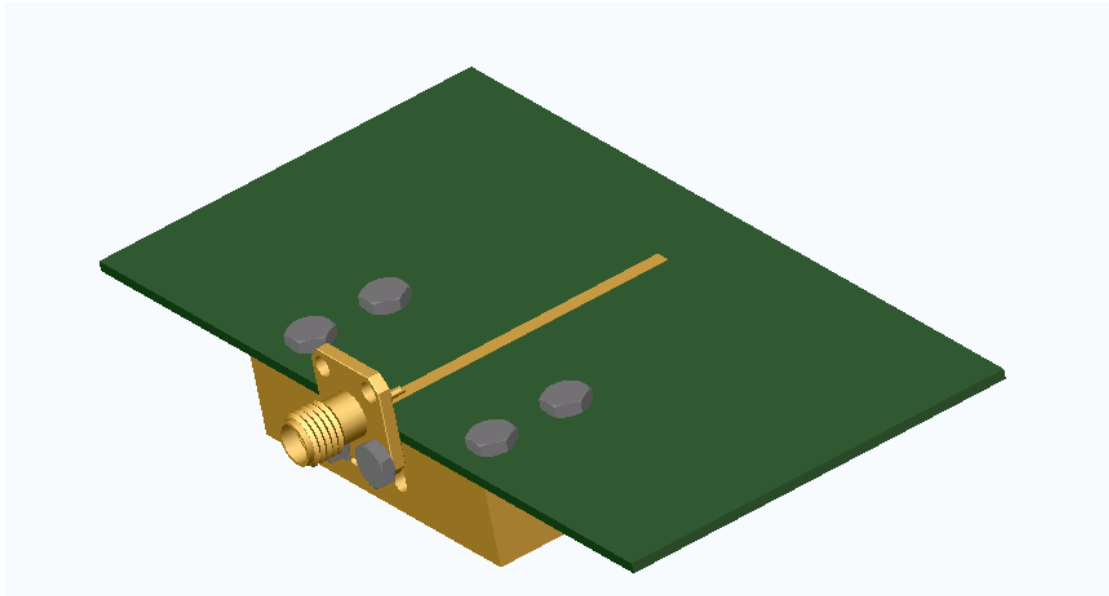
Assembly, where are the SMA connector, holding block, printed circuit board and mounting screws and nuts.
